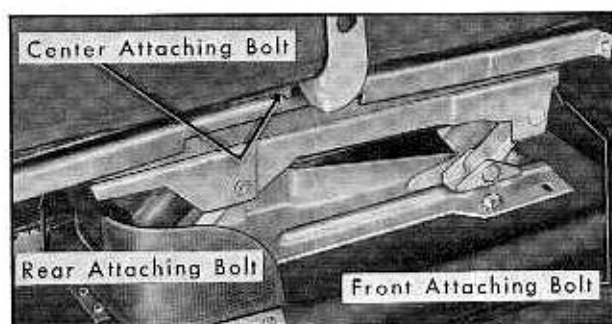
Detaching Seat Assembly from Adjusters (Sedans)
